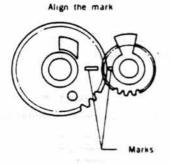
Charge gear positioning Fig. 4 2114 spring setting Fig. 5 2123 spring setting
